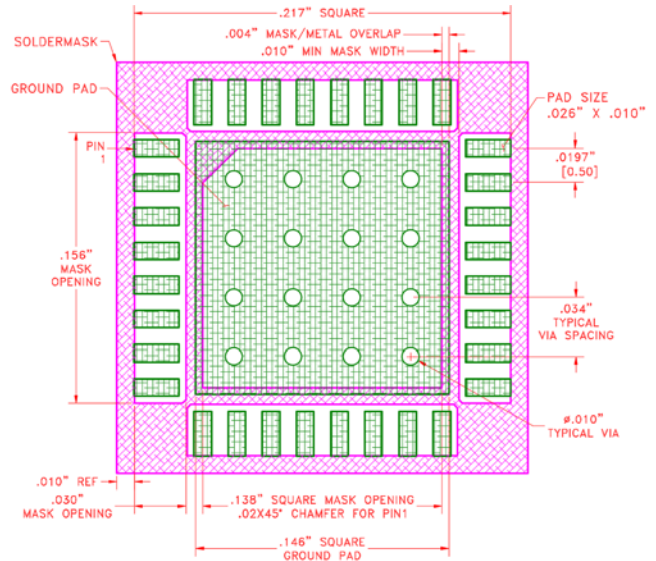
PCB Land Pattern Footprint of the EV1HMC908ALC5
